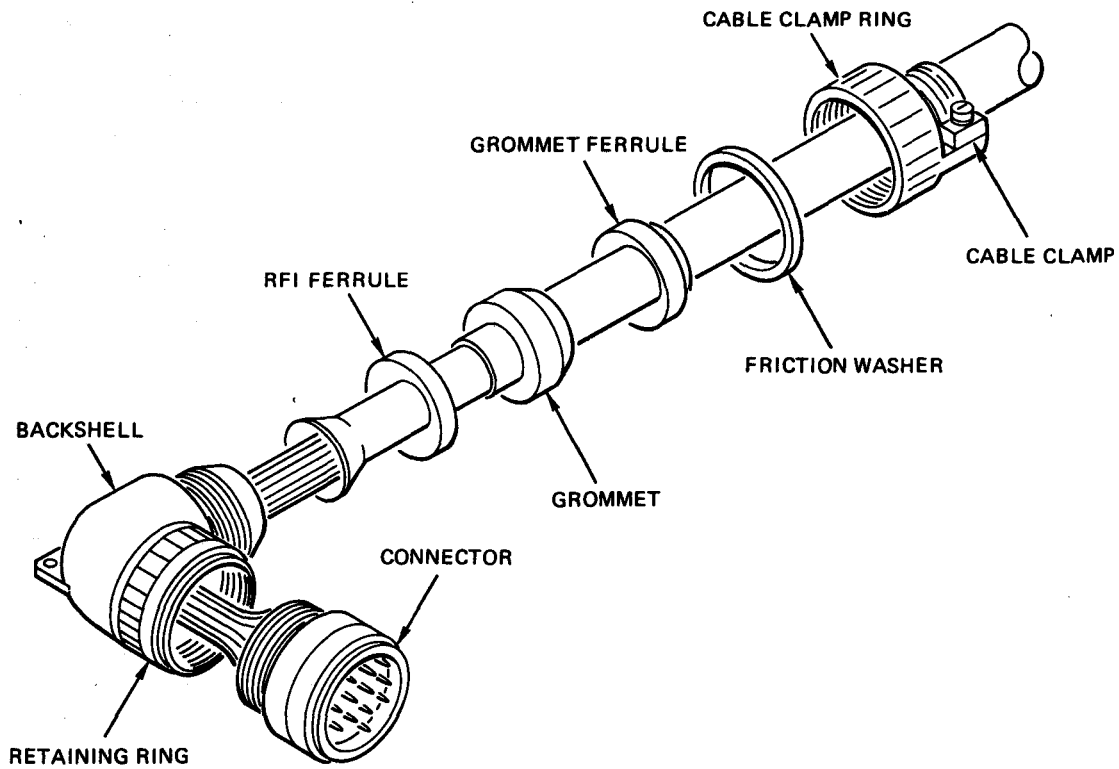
Right Angle Backshell Disassembly/Assembly
